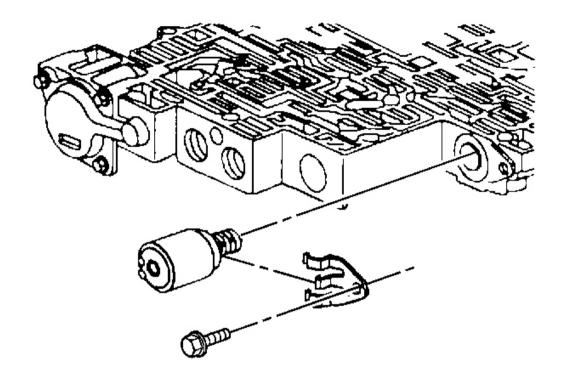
Locating Pressure Control Solenoid Courtesy of GENERAL MOTORS CORP.
